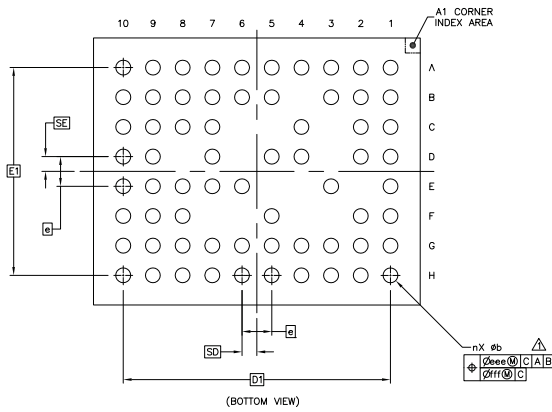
CYW20745, 5.5 mm × 4.5 mm, 66-Ball WFBGA Package Outline Drawing Tape and Reel Specification
